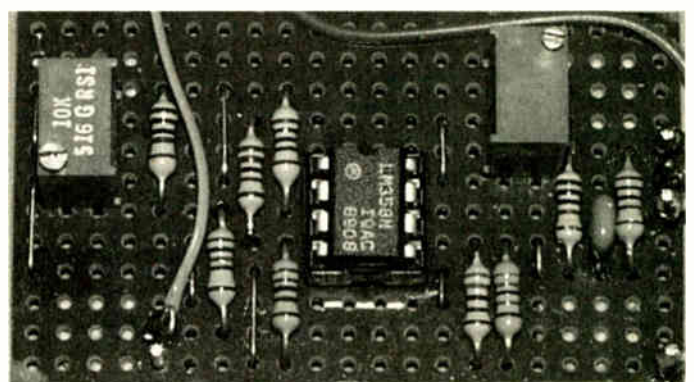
(left) Meter amplifier stripboard details and (below) component layout on completed circuit board.
